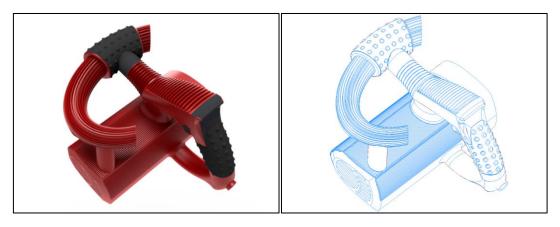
CAD render (left) and wireframe drawing (right) of the final circular saw prototype handle
